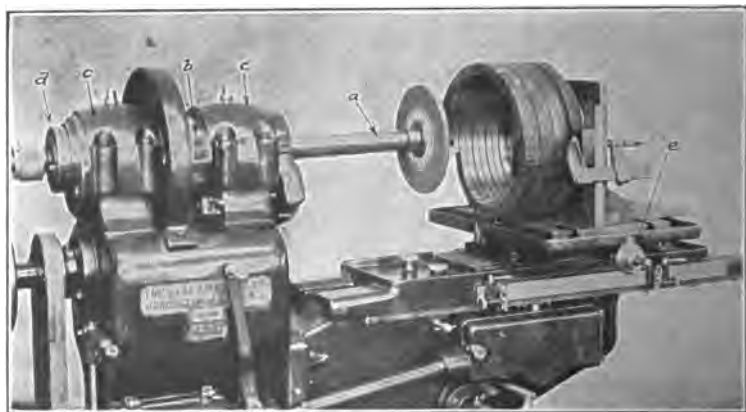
HEALD INTERNAL GRINDING MACHINE
